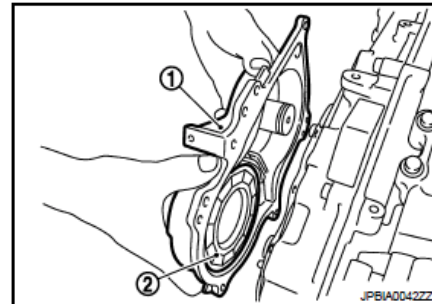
Identifying Valve Timing Control Cover With Gasket To Front Timing Chain Case
